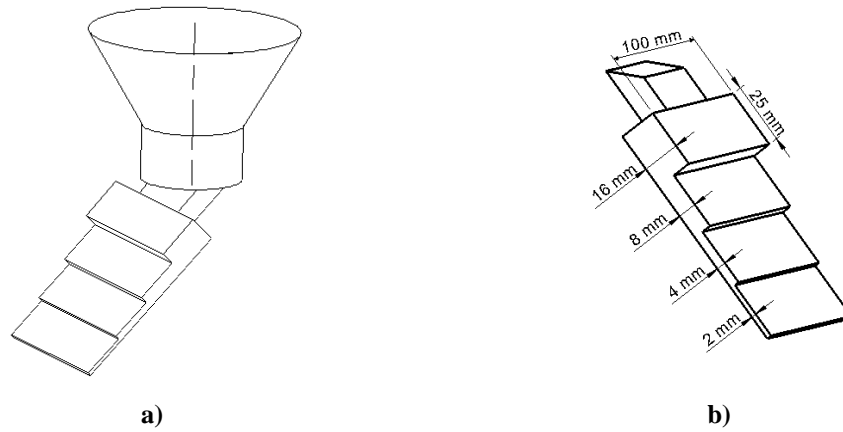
CAD picture; a) Casting part and b) Stepped specimen
